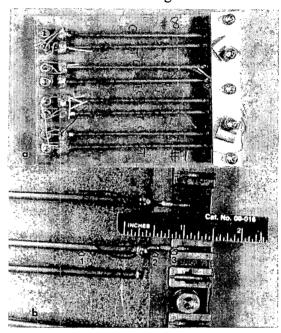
(a) Layout of the fixture. Leads have been cut off. (b). Detail of the crimp side.
